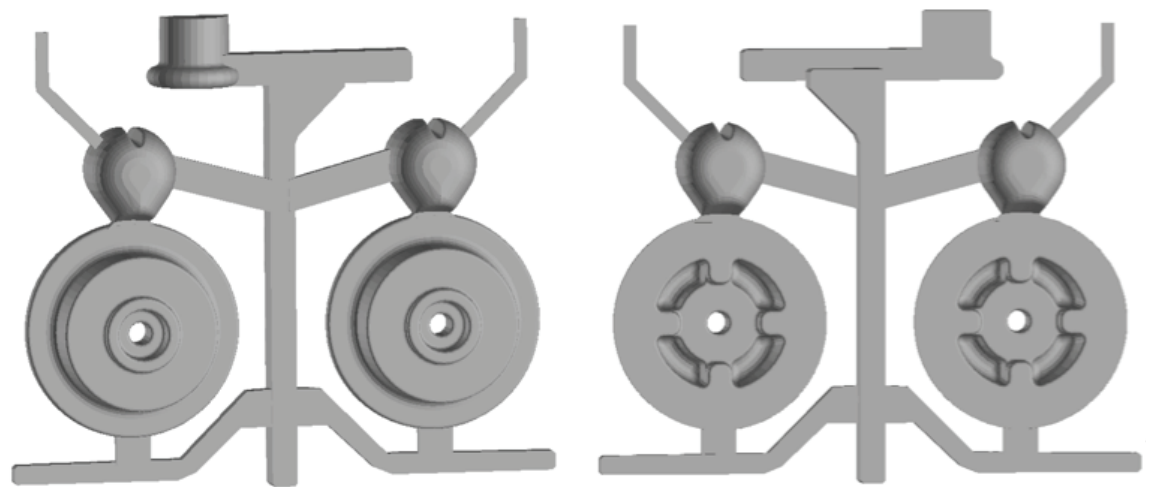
Pattern layout for a ductile iron rotor casting in a vertically parted mold.
